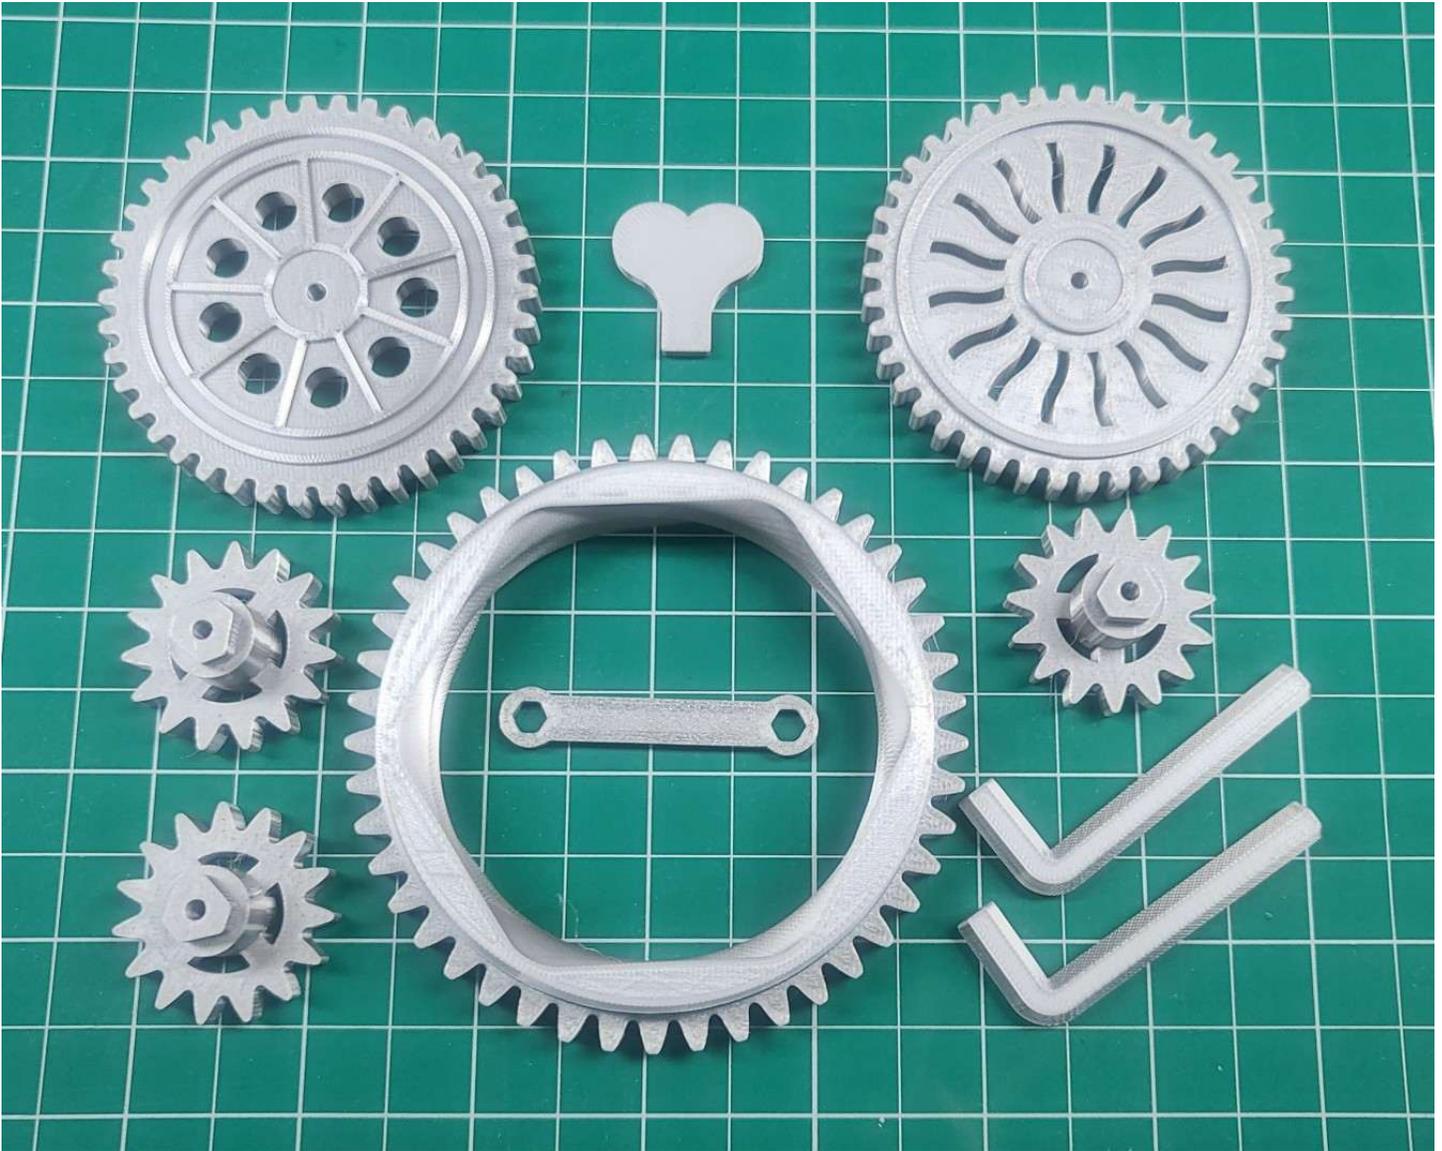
Steam Machine Puzzle Box Silver Silk PLA Parts
